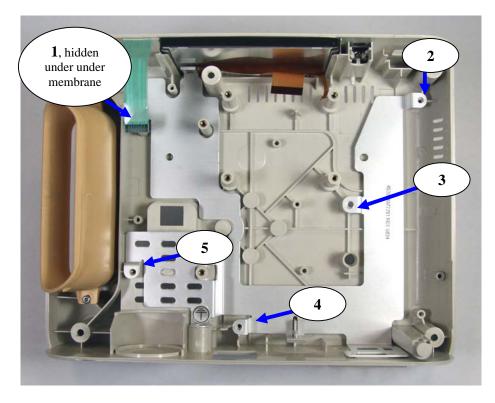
Sheet metal view (five mount locations, screws through various PCA's & sheet metal into tapped hole on bottom cover)
